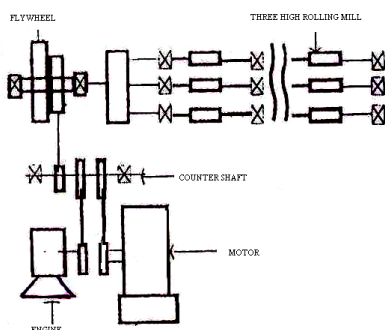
Design of rolling mill with two flywheel and two motor (concept one)
